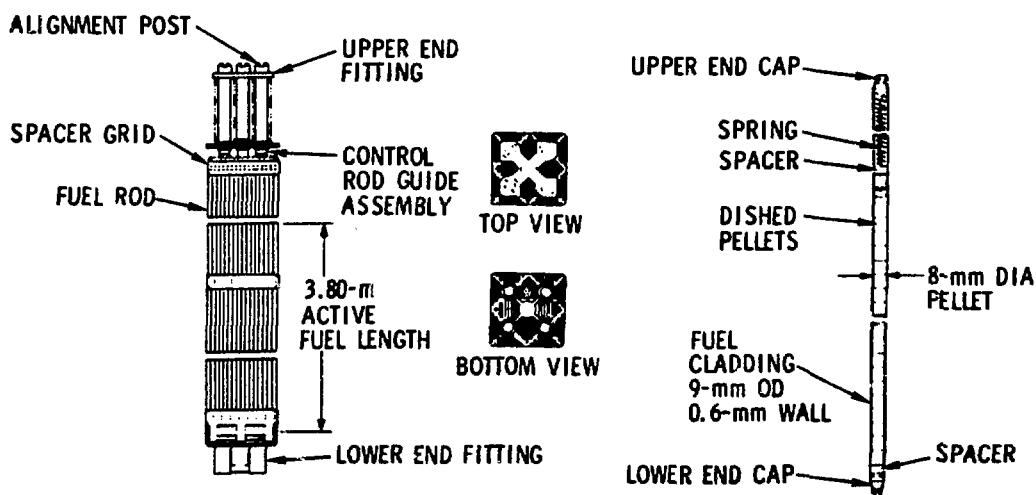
Typical fuel assembly for a pressurized water reactor (courtesy Combustion Engineering, Inc.)
